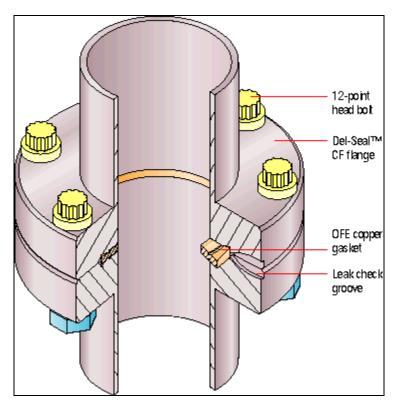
Cutaway view of CF assembly. From MDC Vacuum Catalog.
